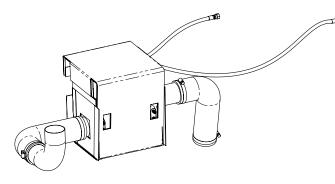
Salsa Heat Exchanger Assembly 601-005-741 Rev. F
